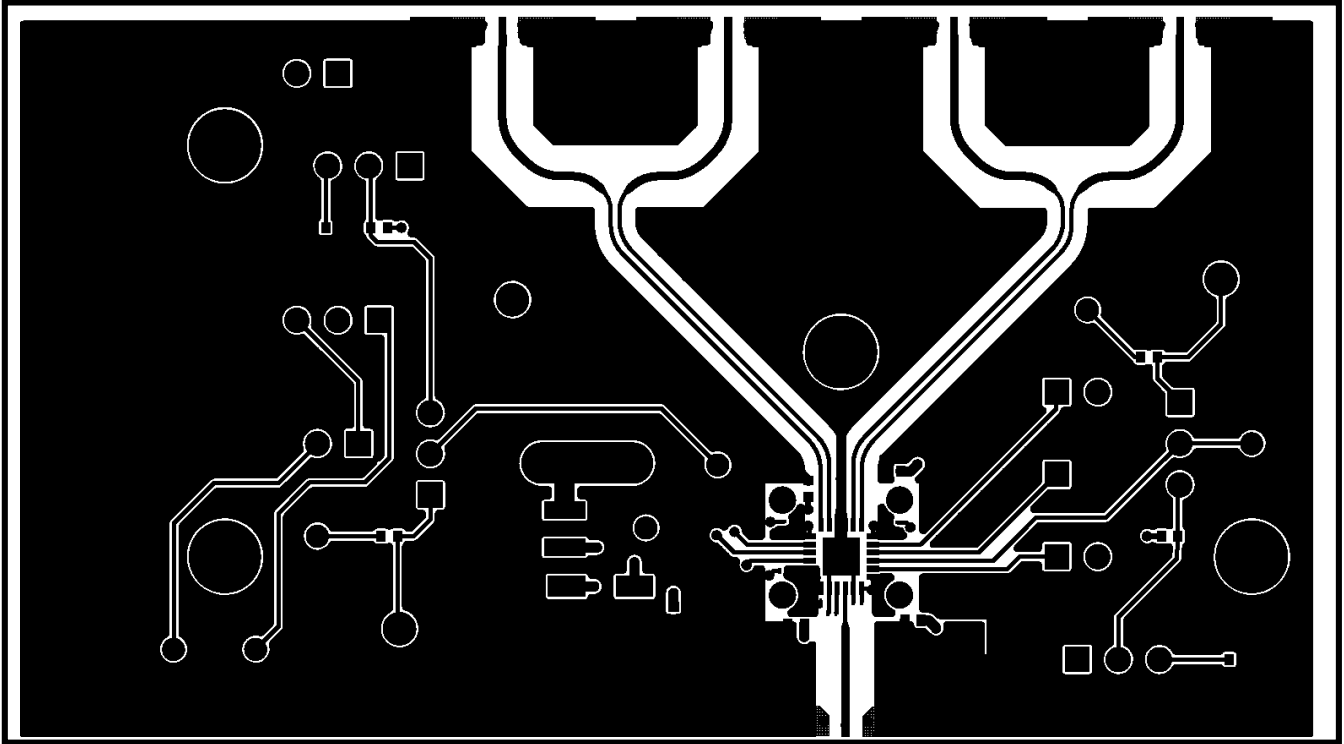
MAX3941 EV Kit PC Board Layout—Component Side
